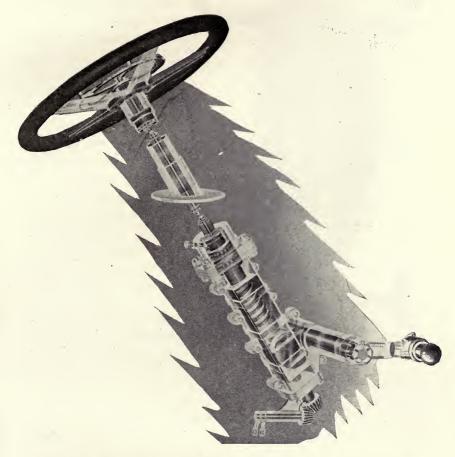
Ross Screw and Nut Type Steering Gear for Fore and Aft Steering.
